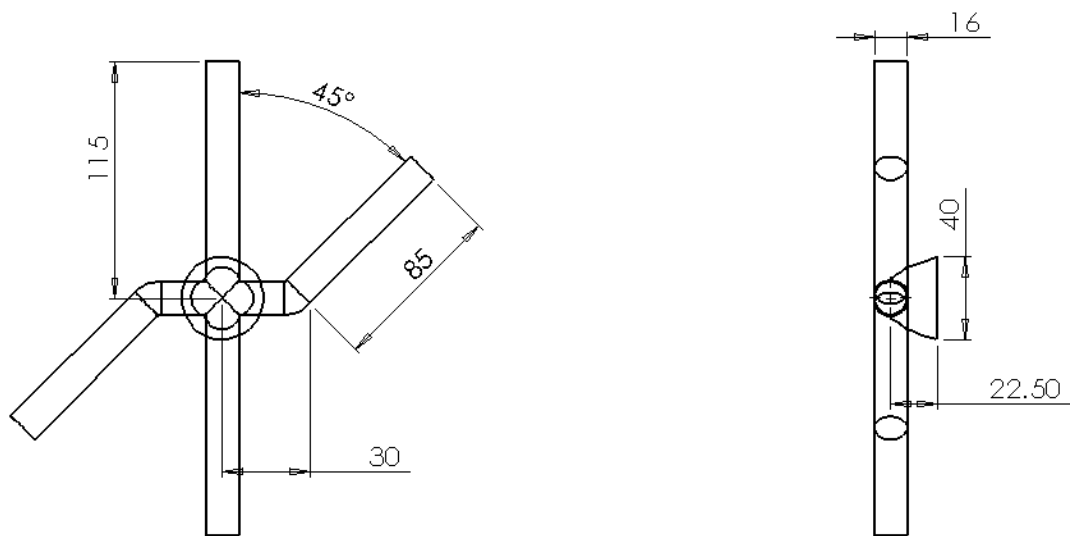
CAD drawing of 0 and 45° mould pattern used in the 3D printed mould design.
